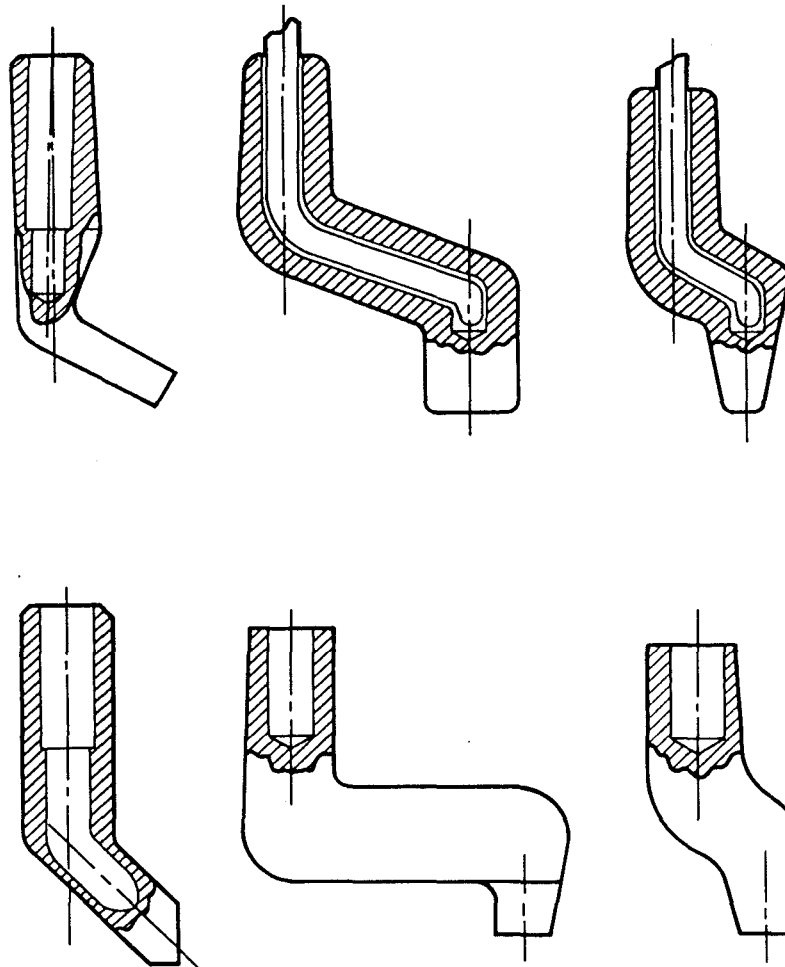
Typical Single and Double Bent Spot Welding Electrodes
